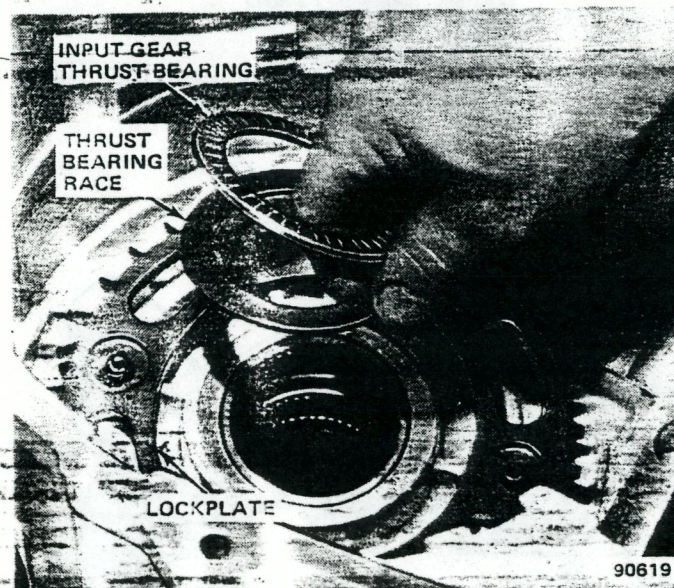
D-24 Input Gear Thrust Bearing and Race Removal—Installation
